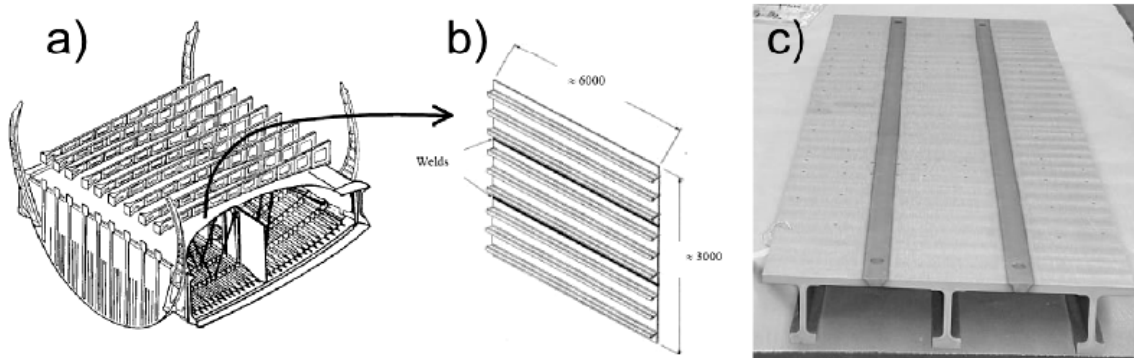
(a) Illustration of an Airbus central wing box. (b) Illustration of the upper panel of the wing box. (c) Test friction stir welded upper wing box panel, note the single extruded panels and the typical near trapezoid shape of the weld region (Marie 2001).
